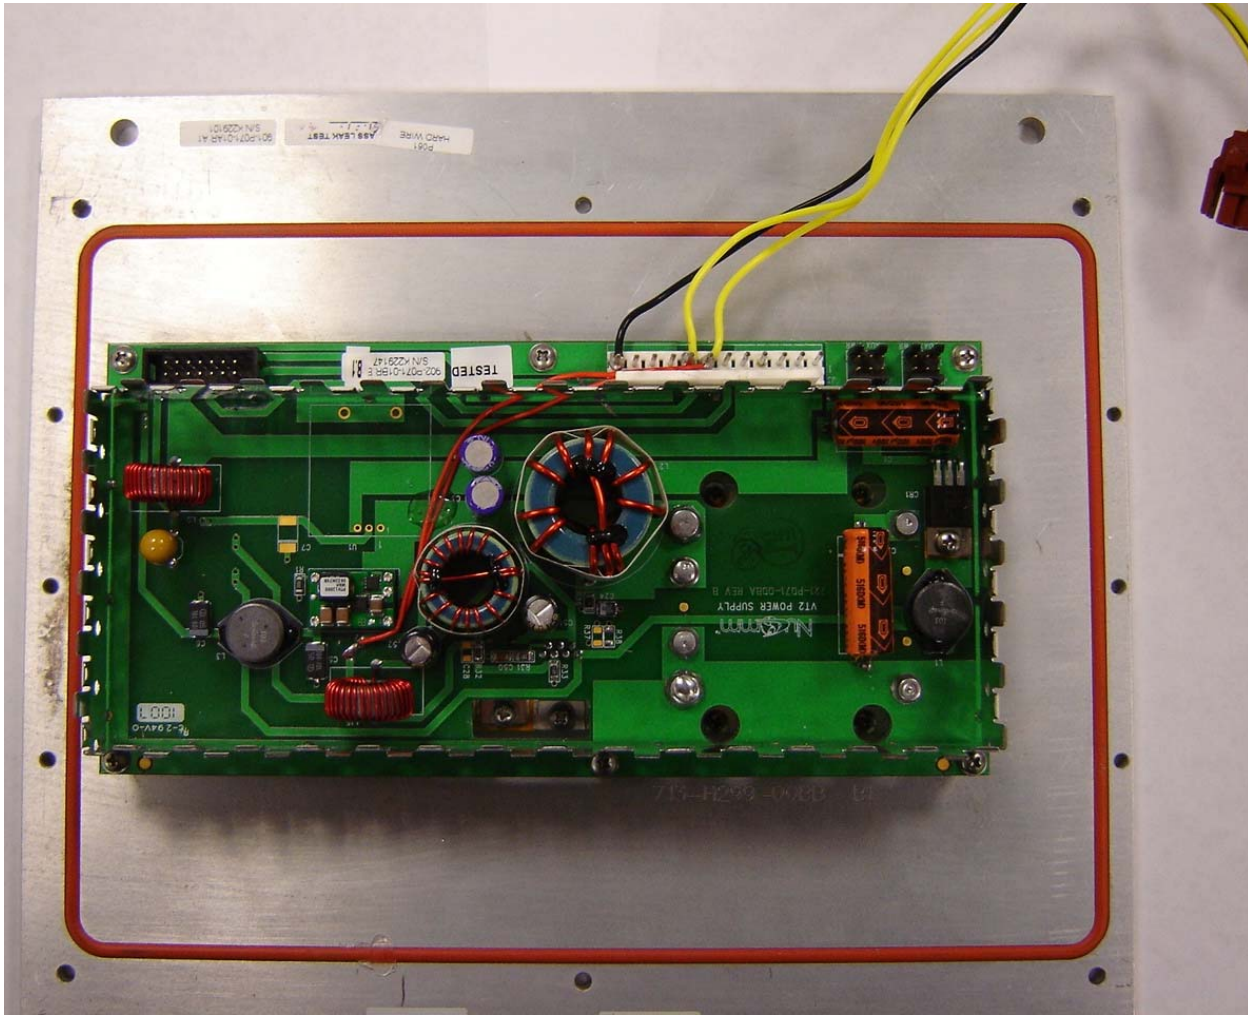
Power Supply Assembly 901-P071-01A without Shield on Upper Cover
